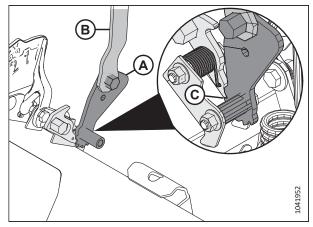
Multi-Tool Engaged with Left Float Setting Assembly
